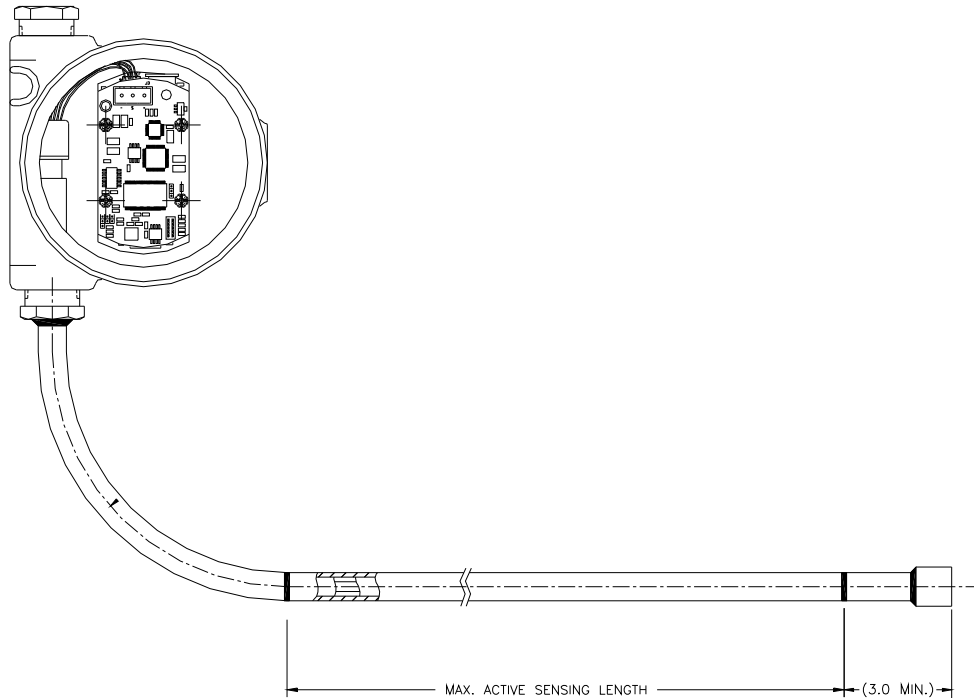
MTII4200-F-A-D-H-x-x-xxx Bent Bottom Left Hand Angled Assembly
